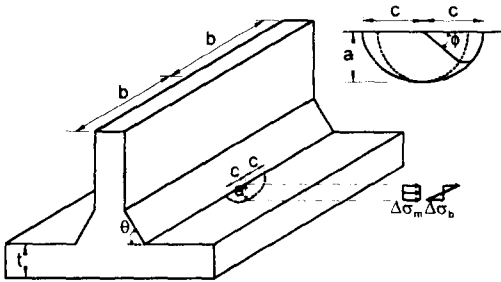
Semi-elliptical crack at the weld toe
